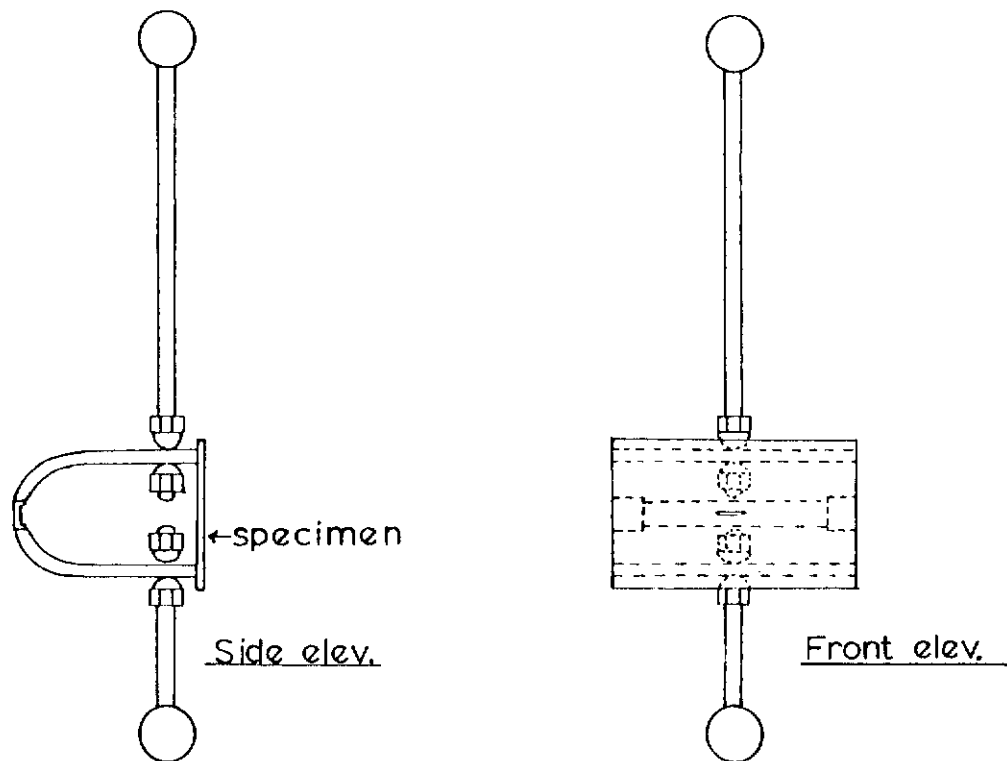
U-SHAPED LOADING JIG FOR PRE-CRACKED PLATE SPECIMENS
